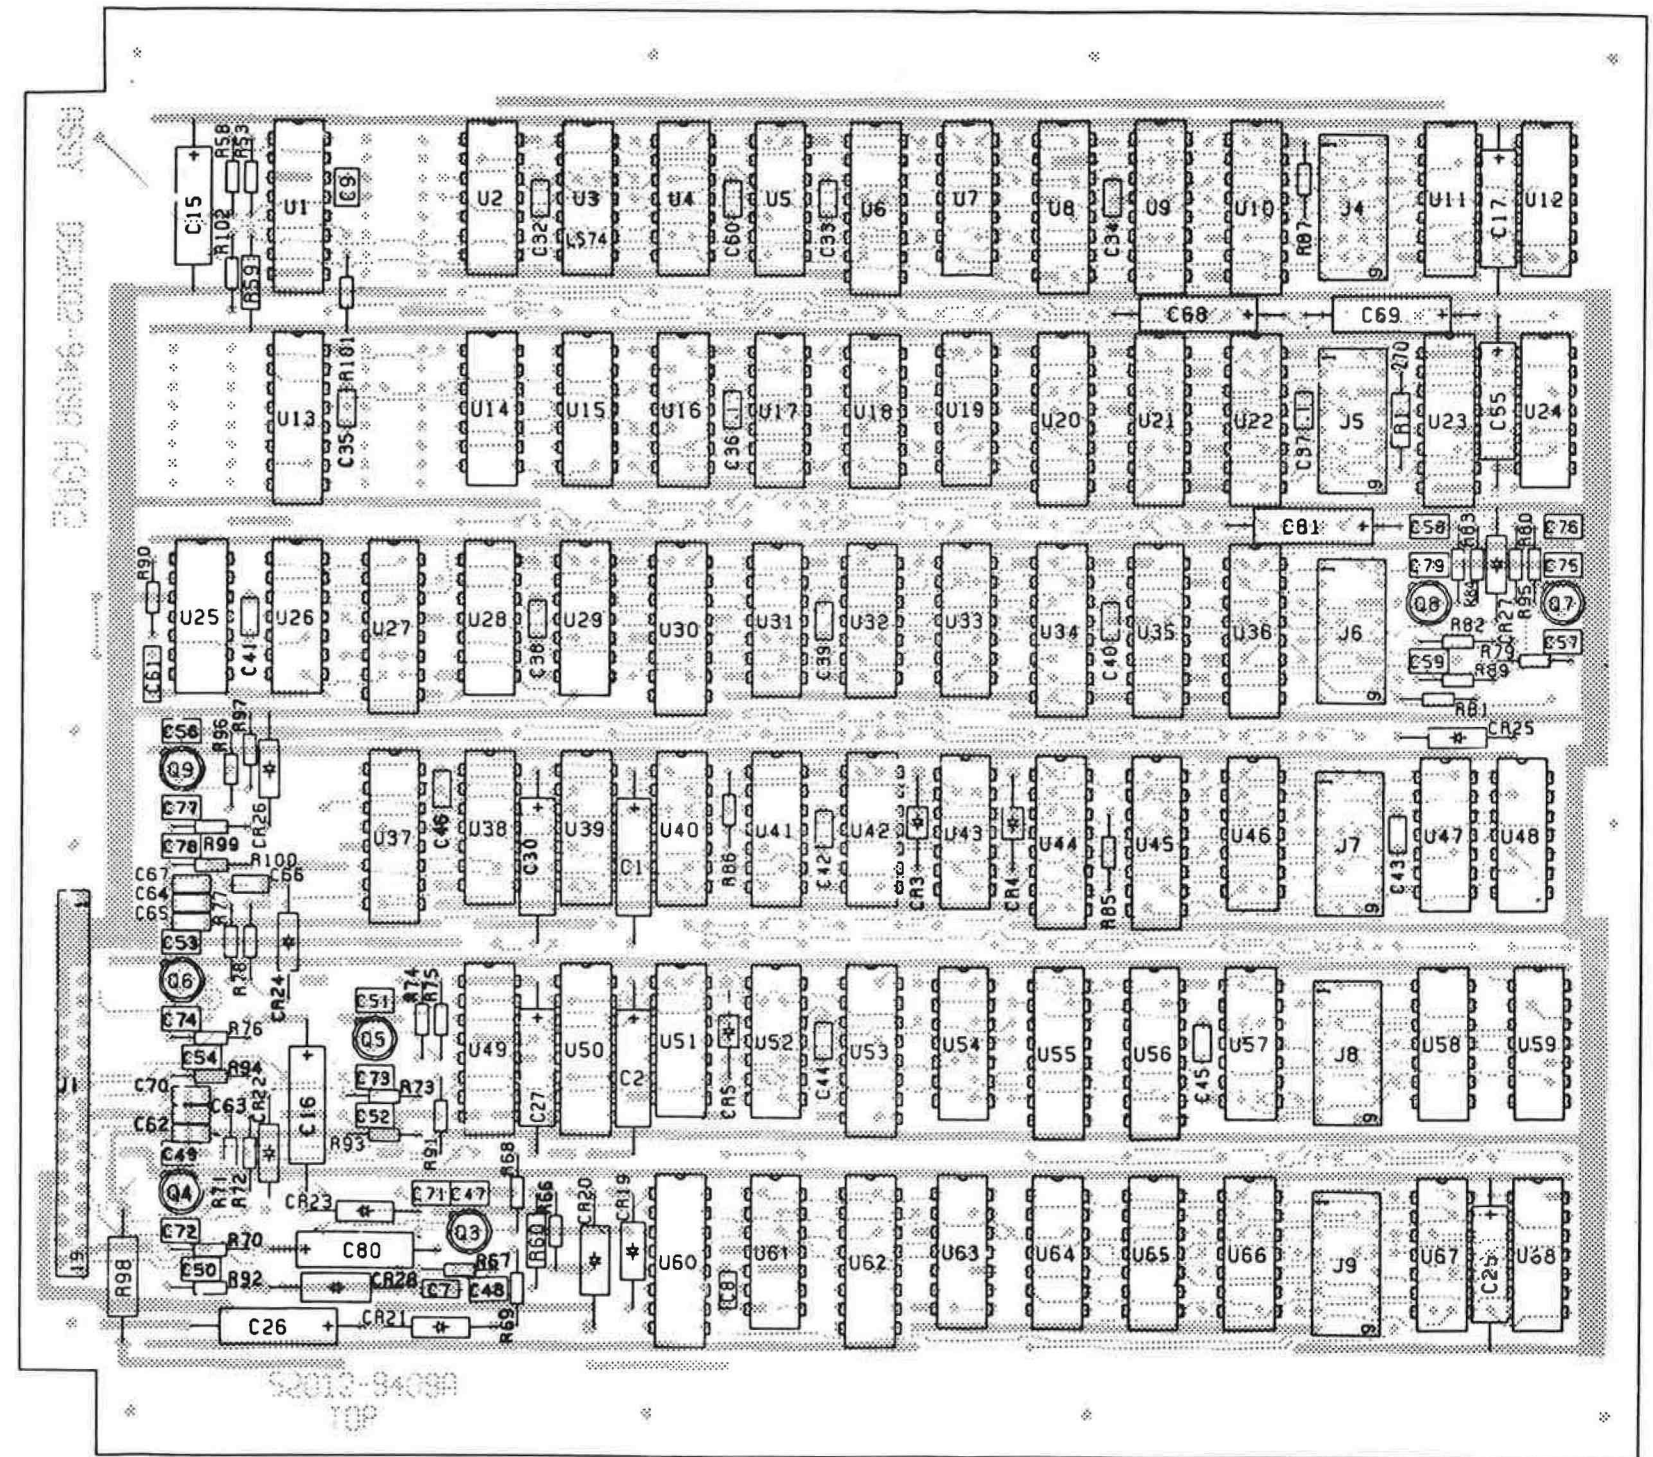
Printed Circuit Board 1A9A2, (P/N 52002-9409), Component Location Diagram (Sheet 1 of 2)
